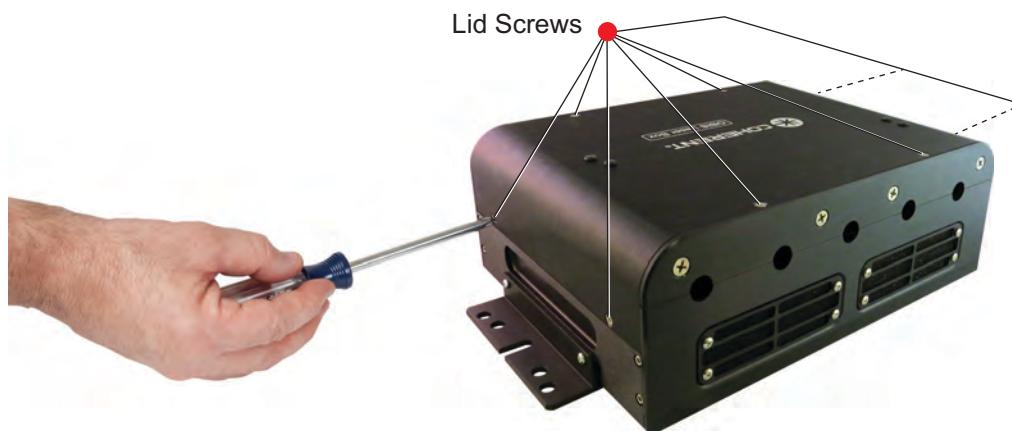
OBIS Laser Box Reinstalling the Laser Box Lid
